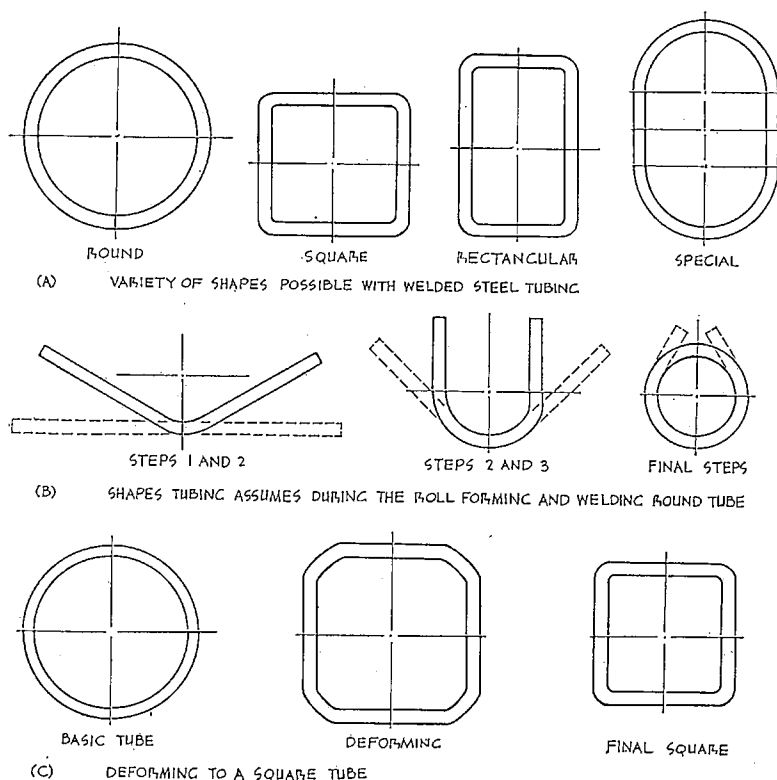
A—possible shapes; B—stages in forming and welding; C—deforming steps.
